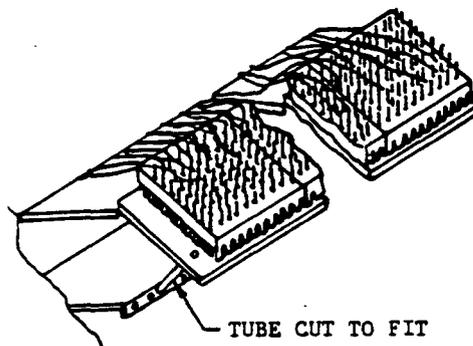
CABLE FORMING AT "COSMIC" MODULES
